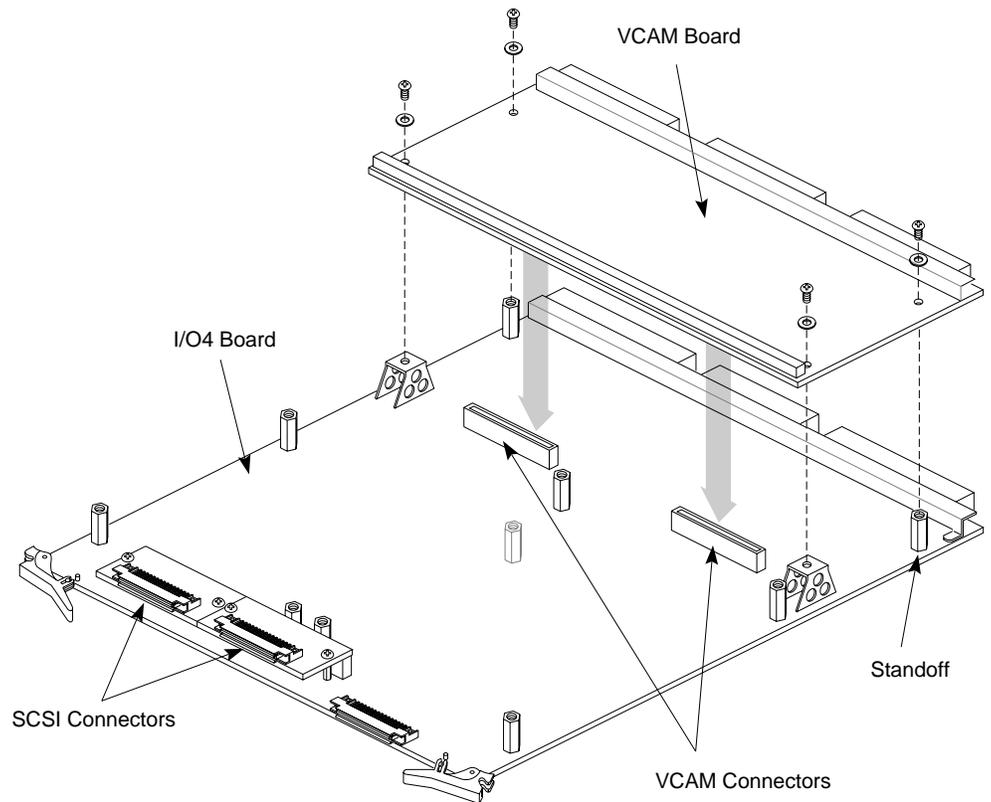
Placement of the VCAM Board on the IO4 Board for CC2
